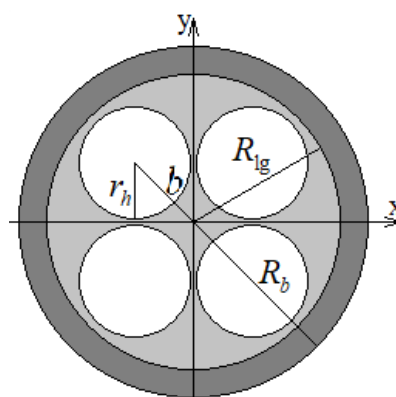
Block of Atwood machine used in the Dnipro University of Technology
